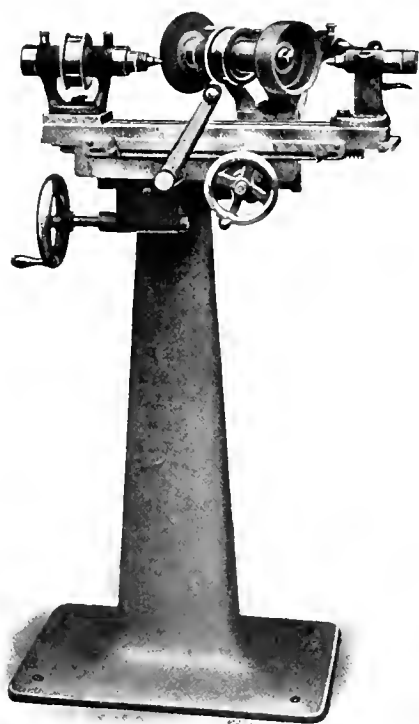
Universal Cutter Tool and Cylindrical Grinder for Tool-room Use
